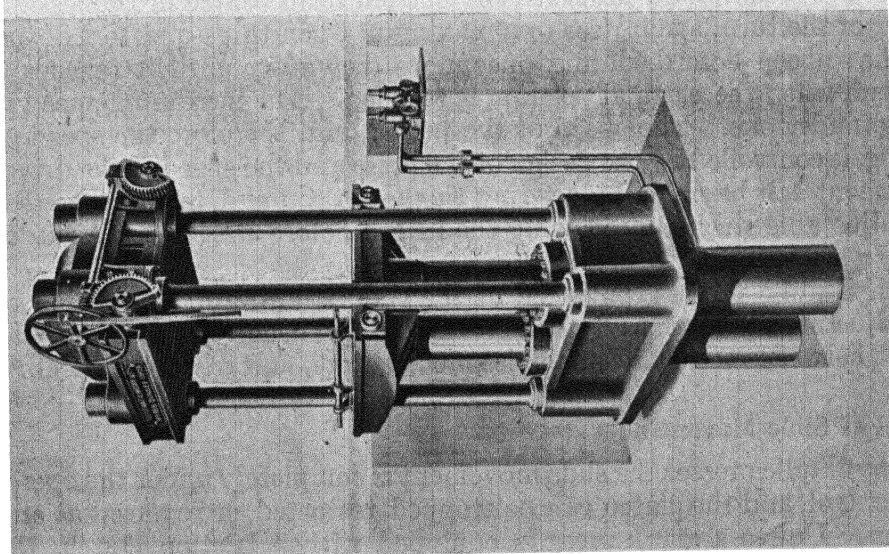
HYDRAULIC PACKING PRESS WITH
